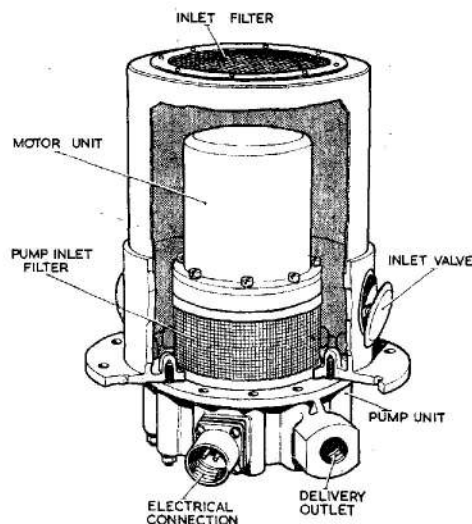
Part sectional view of PDC20 Mk. 2 fuel pump and inverted flight valve
